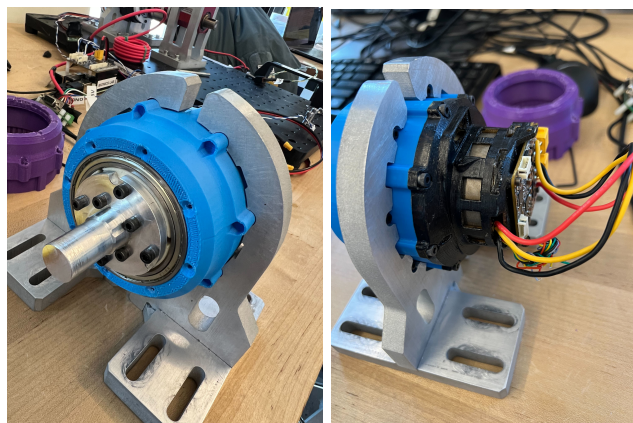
Final Housing Assembly, Left - Front View, Right - Back View
